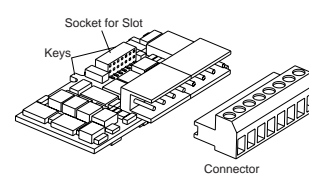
Remove the connector before installing the Input 2-3 Module.
